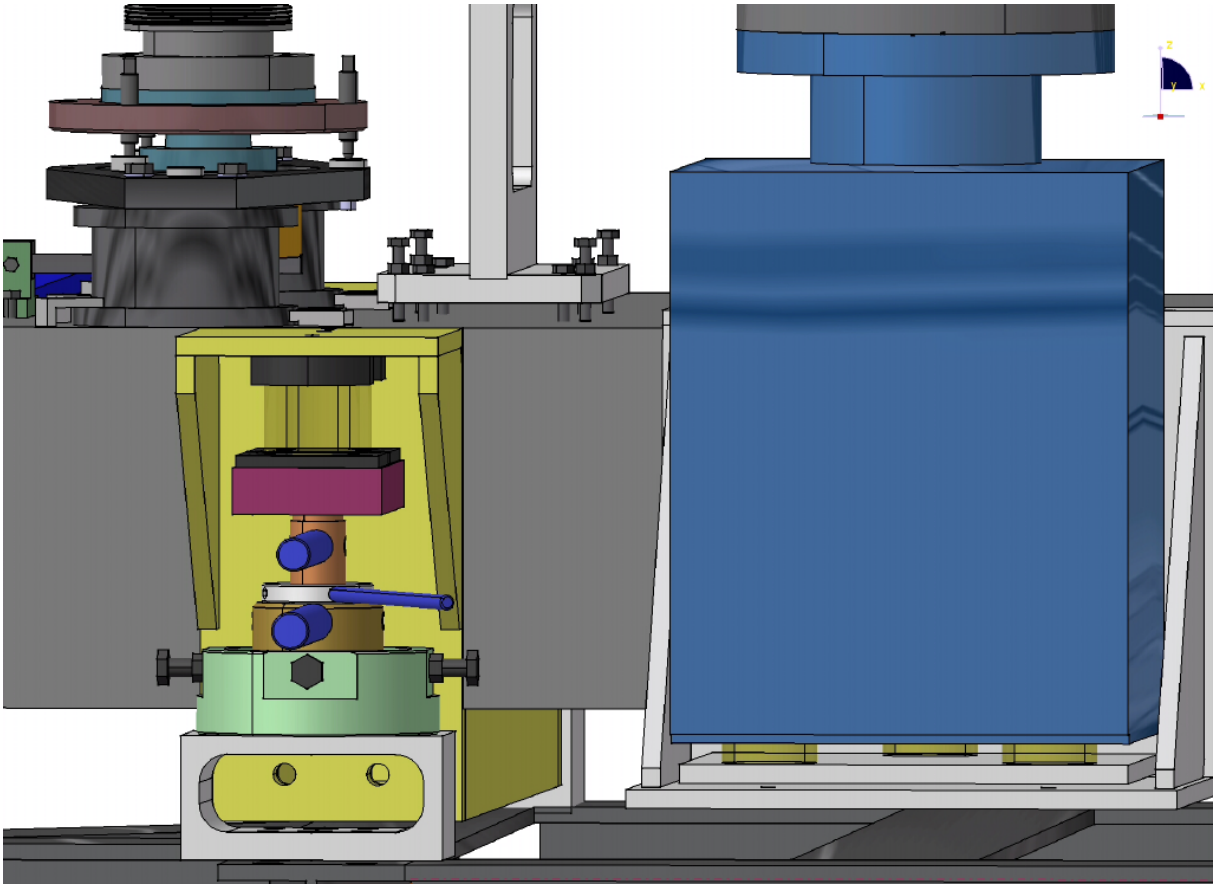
Technical drawing of the ion pump (blue cube on the right of the figure) and of the optical table mount. From [10].
